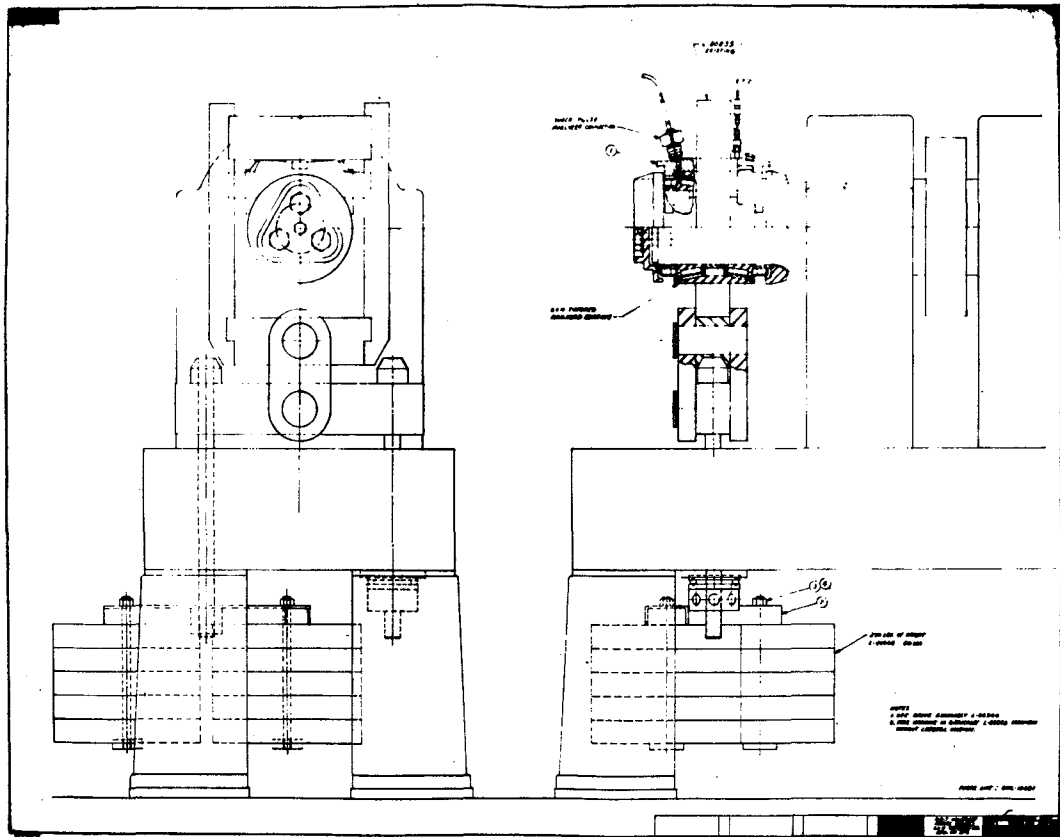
MODIFIED RAILROAD BEARING TEST MACHINE
